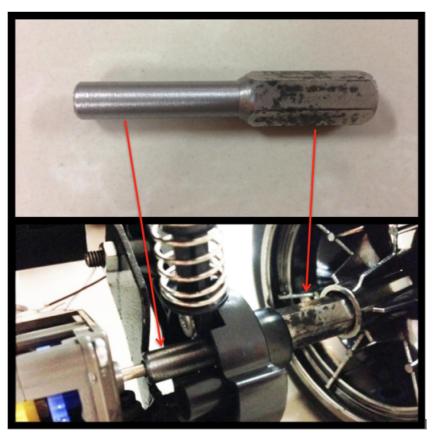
Connecting piece between Double gearbox and RC car's wheel
